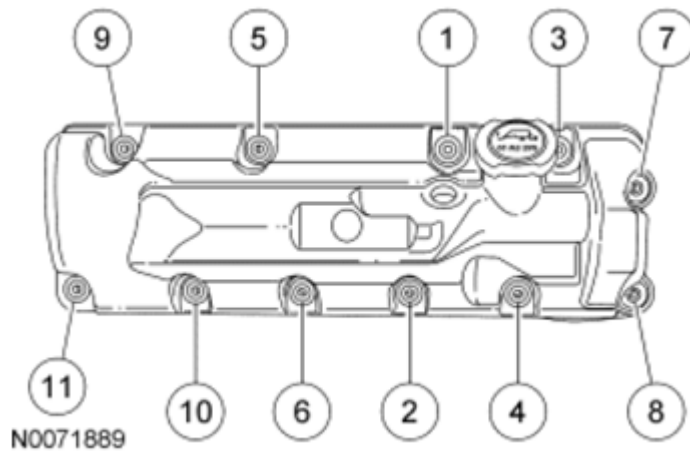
Identifying Valve Cover Fasteners Tightening Sequence
